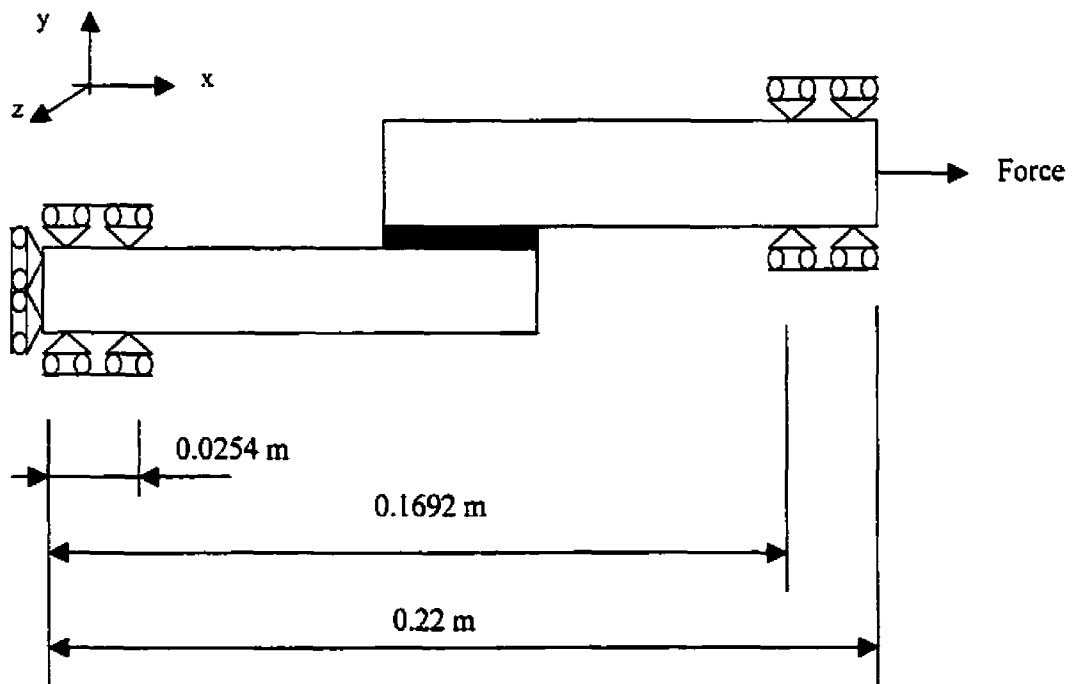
Loading and boundary conditions for a single-lap joint under out-of-plane load
